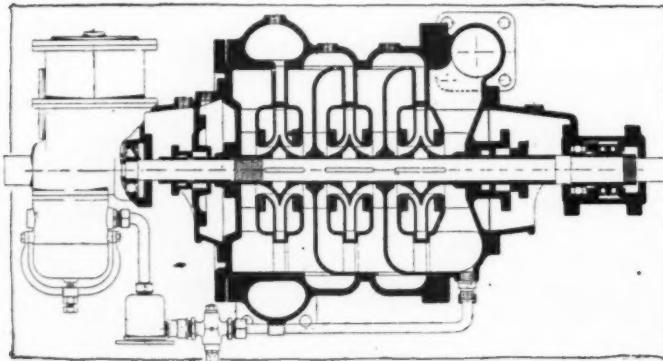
Sectional view of Sulzer triple centrifugal pump with air-exhausting attachment
